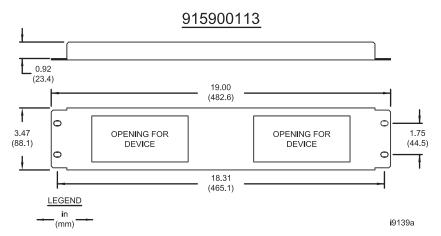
SEL-9510 Two-Opening Panel Cutout Dimension Drawing
